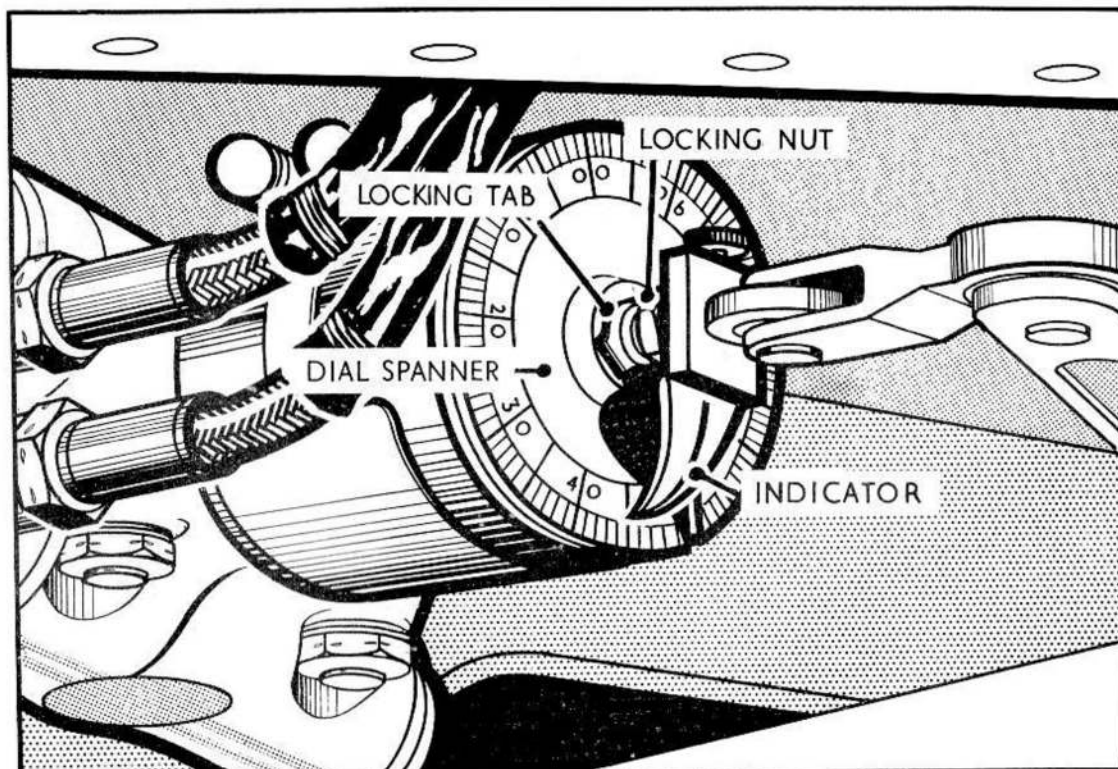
ADJUSTING AILERON BOOSTER UNITS
